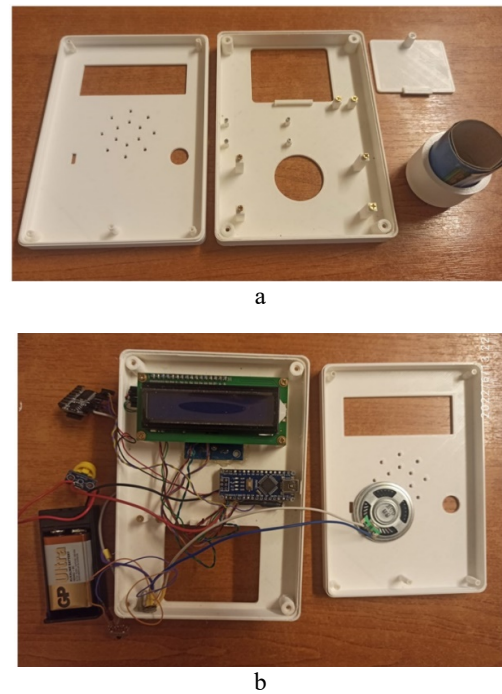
The prototype assembly process: *a* – Final casing parts before assembly; *b* – Assembly of electronic components.
